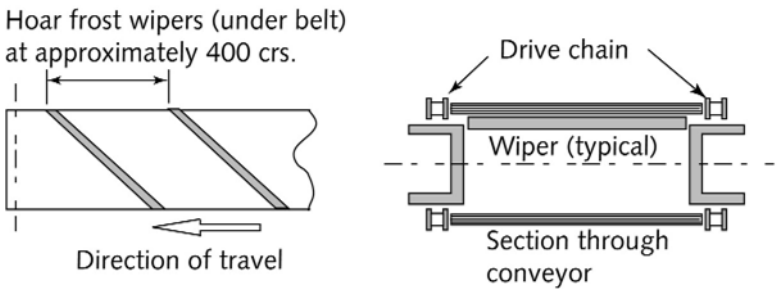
Schematic views of the conveyor belt and conveyor frame
